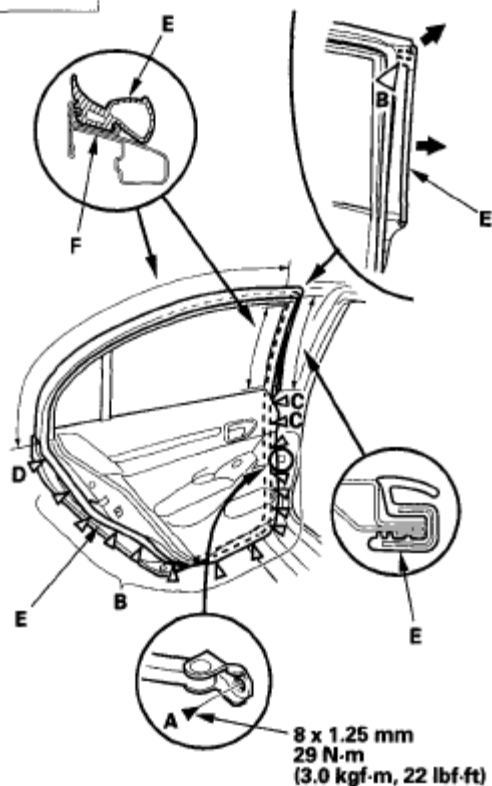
Removing Door Checker Mounting Bolt (With Specifications)
